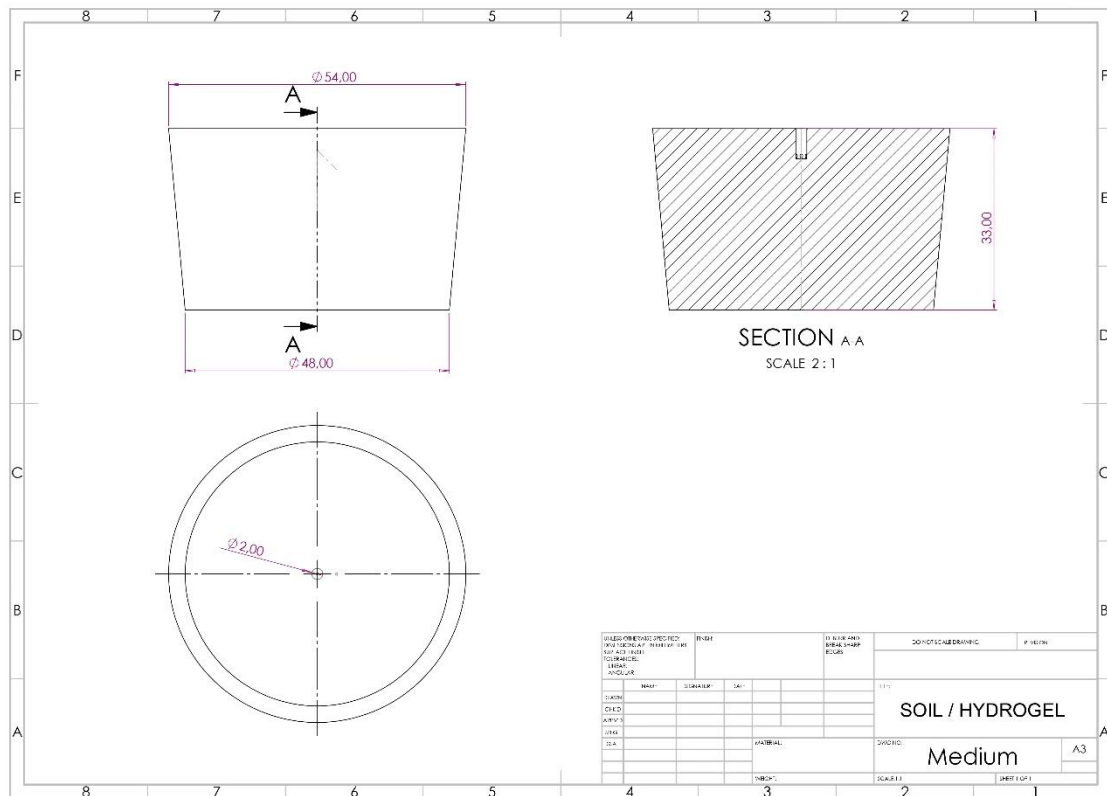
Technical drawing representing both the soil and hydrogel mediums, with specified dimensions and parameters.
